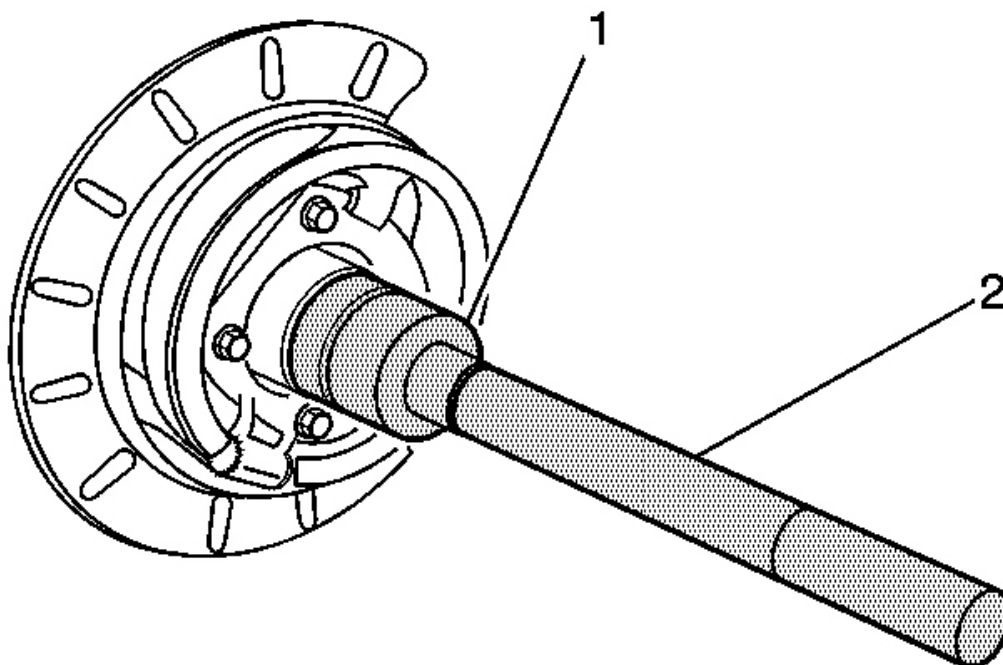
View Of J 45860 & J 8092 Wheel Speed Sensor Ring Installation Tools
